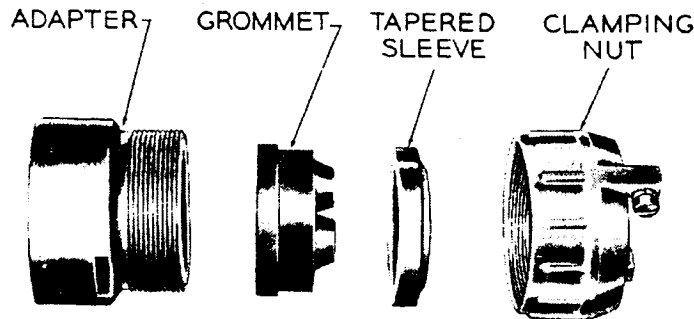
10-113196 Adapter and 71-74900 cable clamp for individual waterproofing of open wire bundles. Adapter has left hand thread at connector end and right hand thread at cable end.
